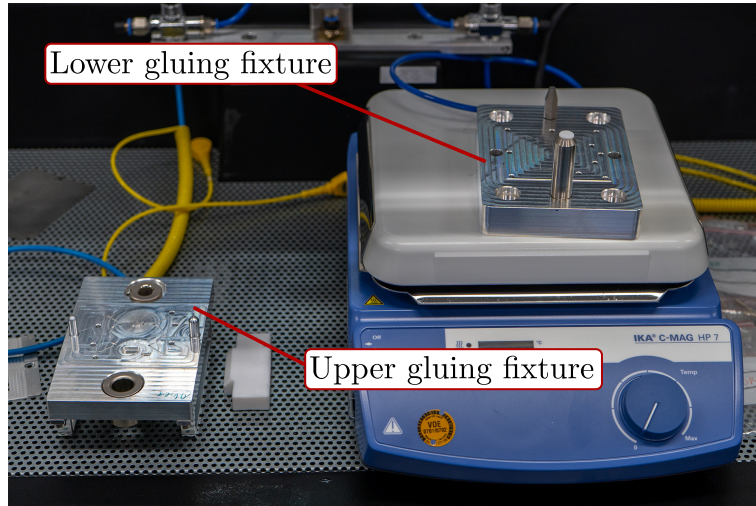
Fixtures used for OBWBP gluing. The upper gluing fixture received the canopies. The lower gluing fixture holds the module. Holes for alignment pins are present in both. The upper fixture fits on top of the lower fixture.
